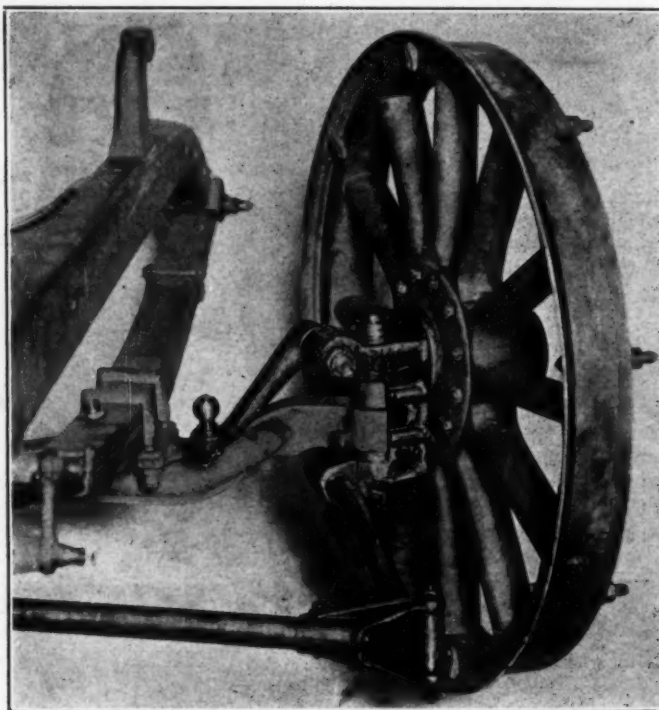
Front axle and knuckle, depicting the steering arm and cross-rod with liberal universal joints
